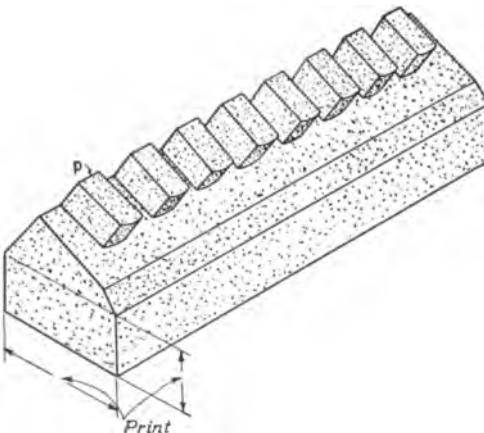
Dry-Sand Core for Making Holes in Stripping Plates through Which Pattern Is Drawn
